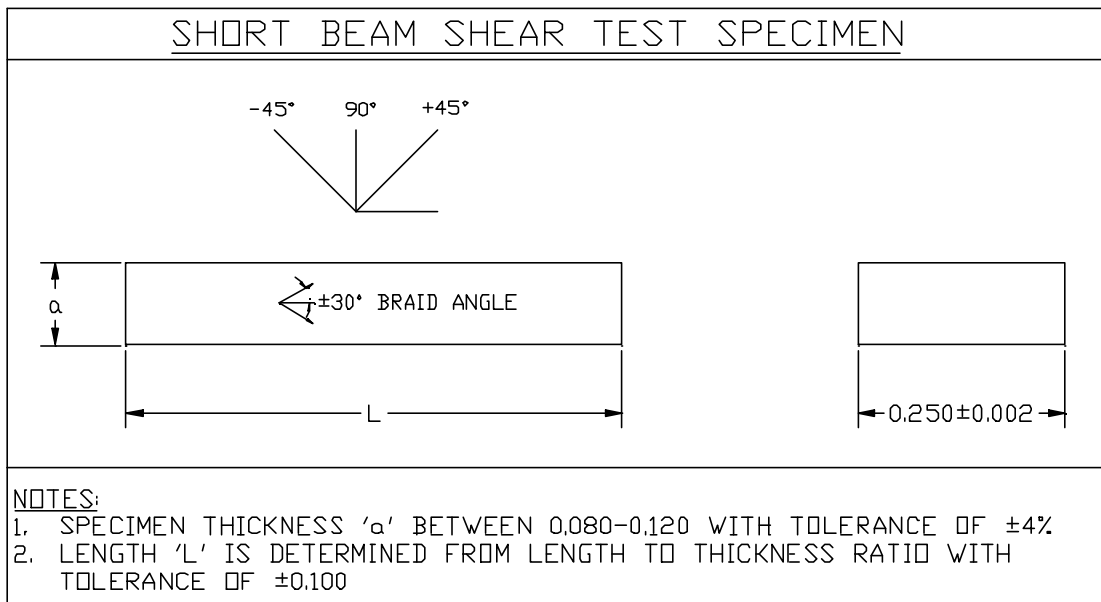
±30° Braid Angle Short beam shear strength specimen.
